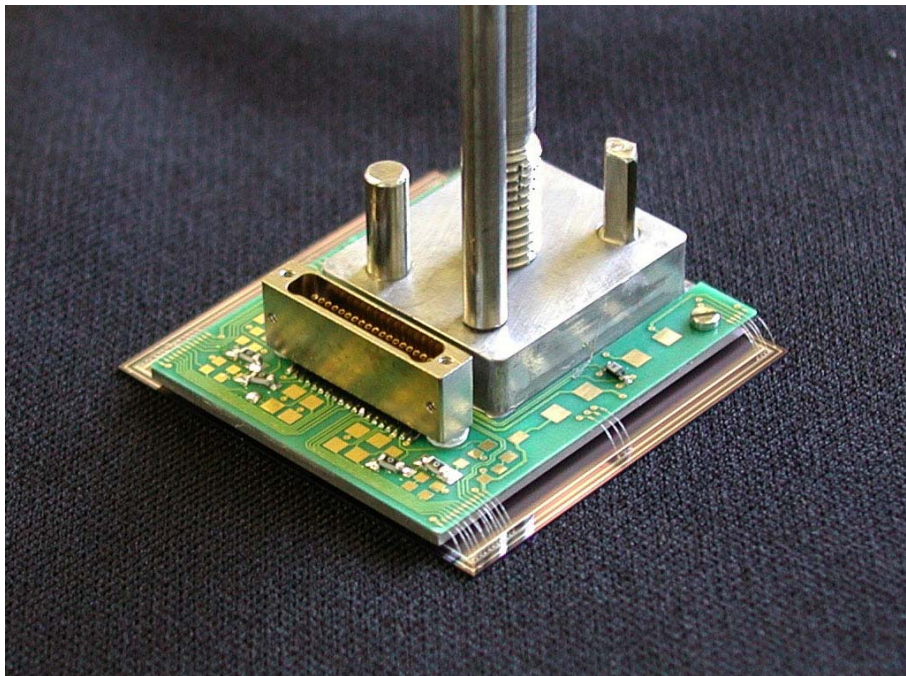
Four-side abuttable packaging developed for front side illuminated CCDs. The CCD is at the bottom of the stack and is glued to a molybdenum mount. A printed circuit board is connected with wire-bonds down to the CCD.
